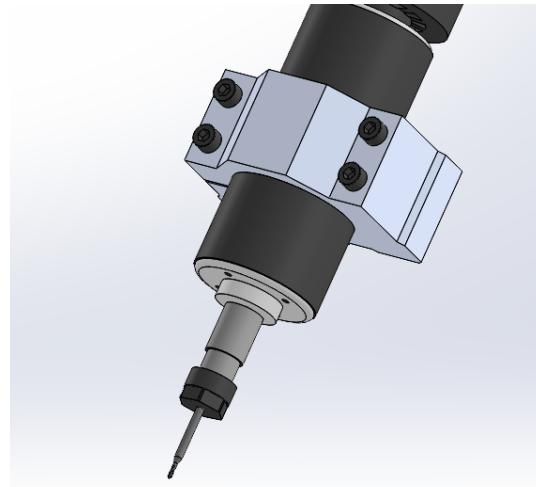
Milling Tool attaching to the Spindle Motor
